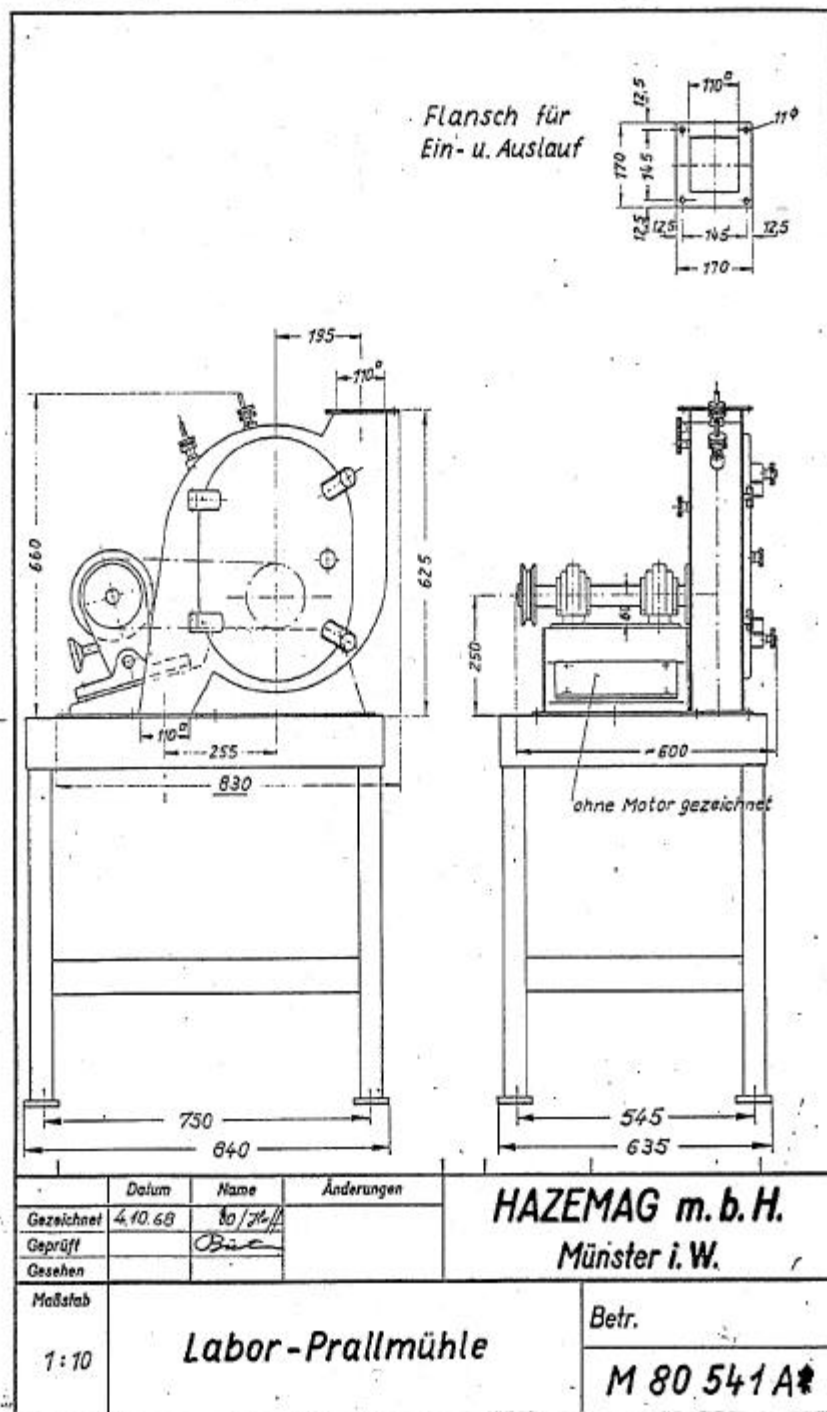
IMPACT MILL - OVERALL VIEW
